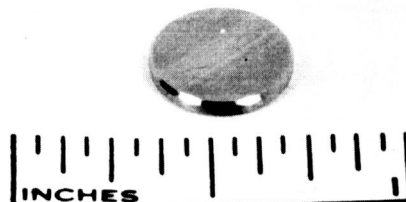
Self-Aligning Pivoted Pad Bearing Components.
